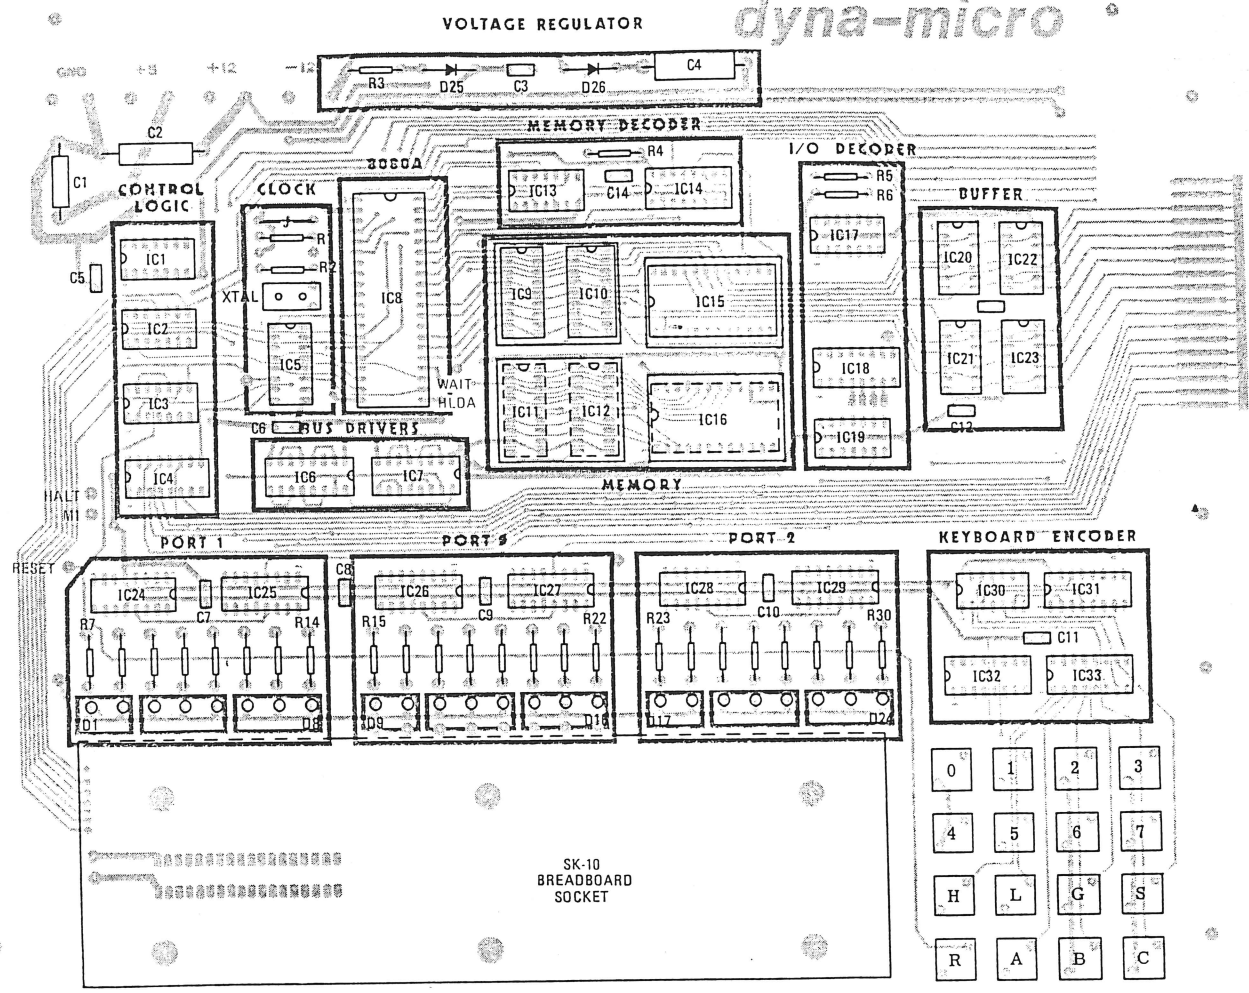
COMPONENT PLACEMENT diagram. The board is shown divided into functional sections.
